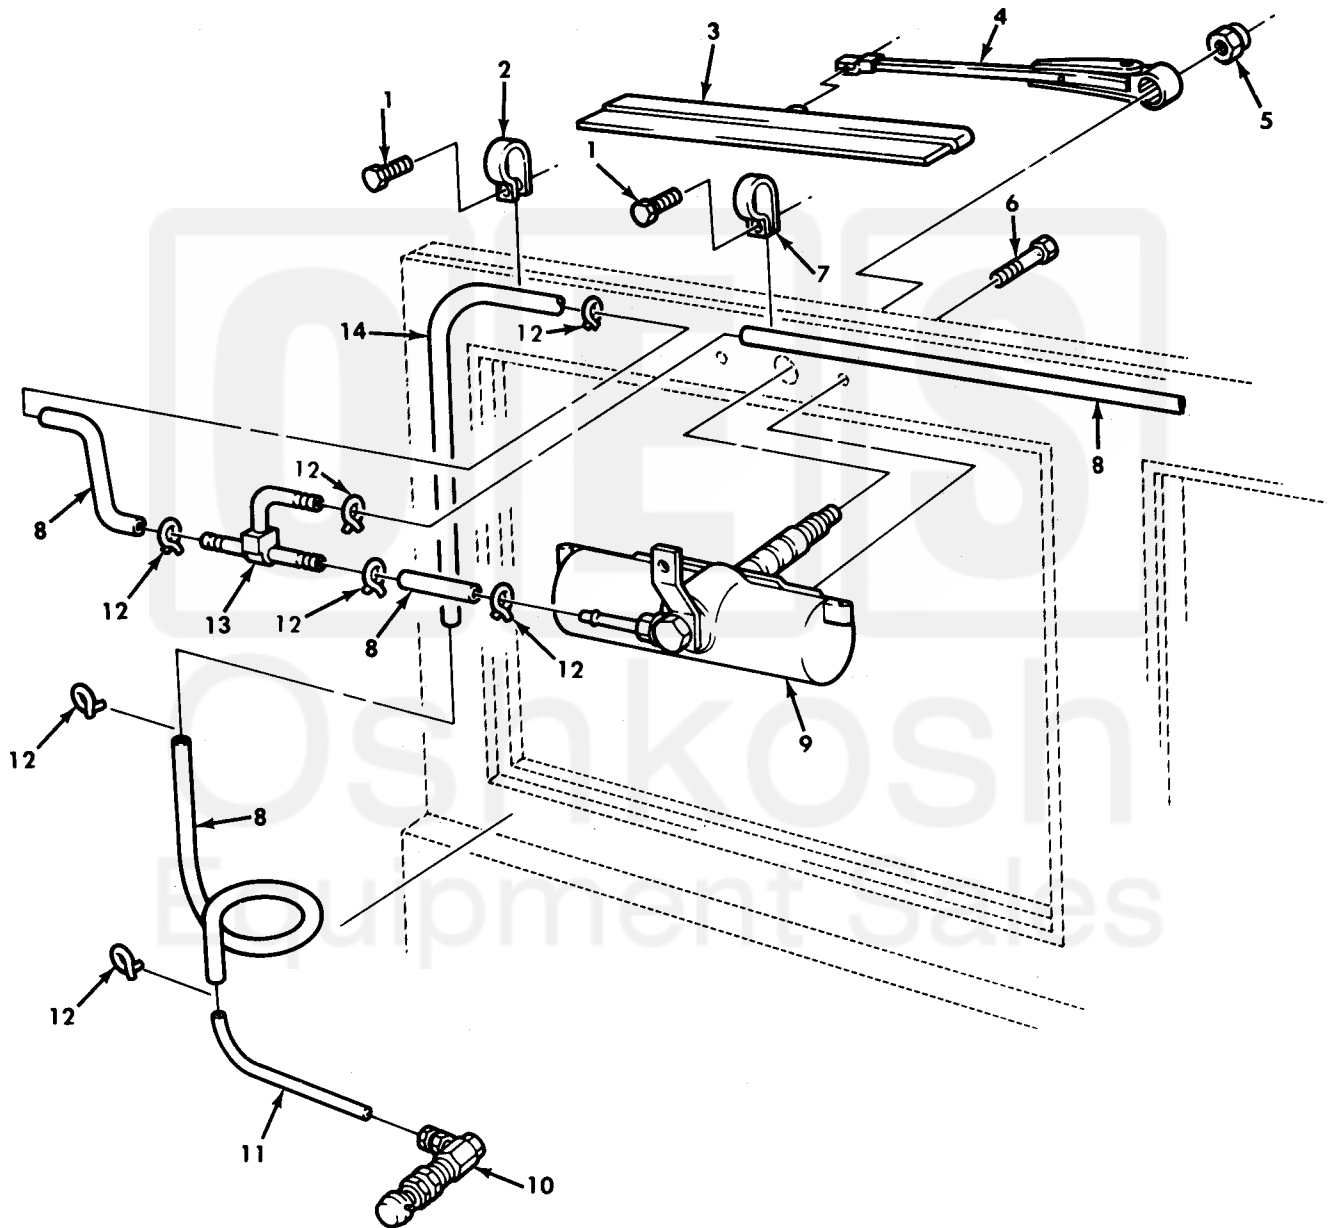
Windshield Wiper Arm, Blade, and Mounting Hardware.
